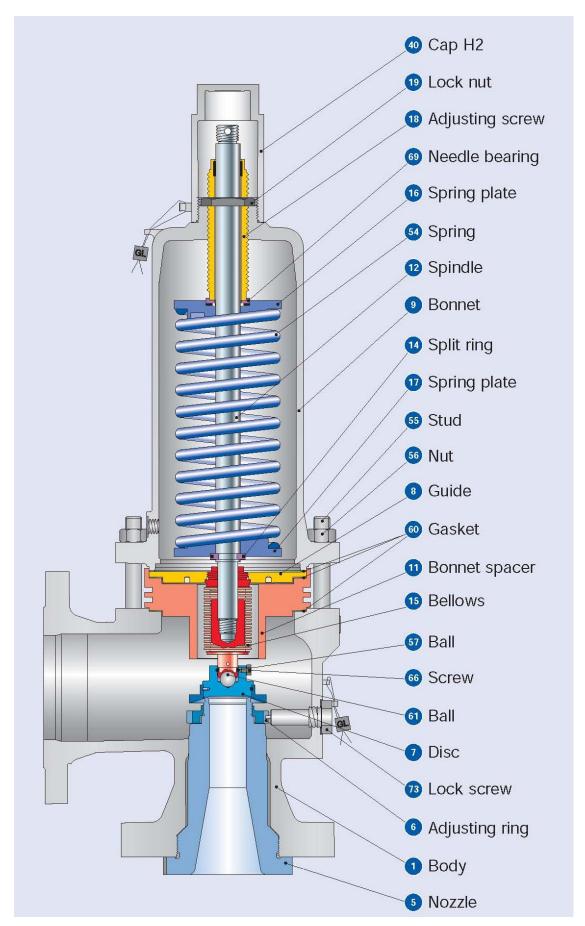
Parts of a Balanced Bellows Spring Loaded Safety Valve - Flanged
